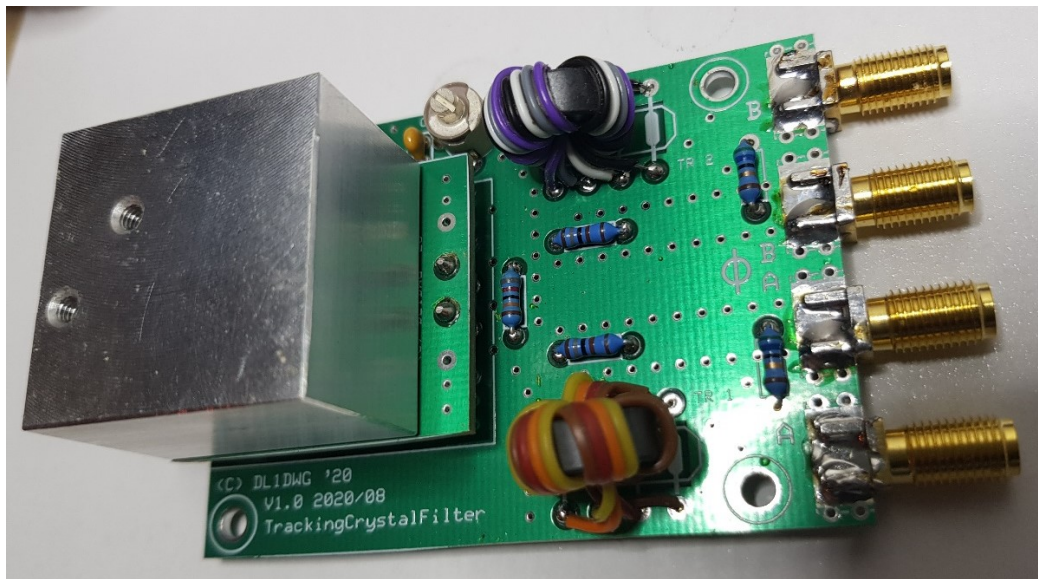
Filter PCB with Mounted Crystal Inside the Heater Block
